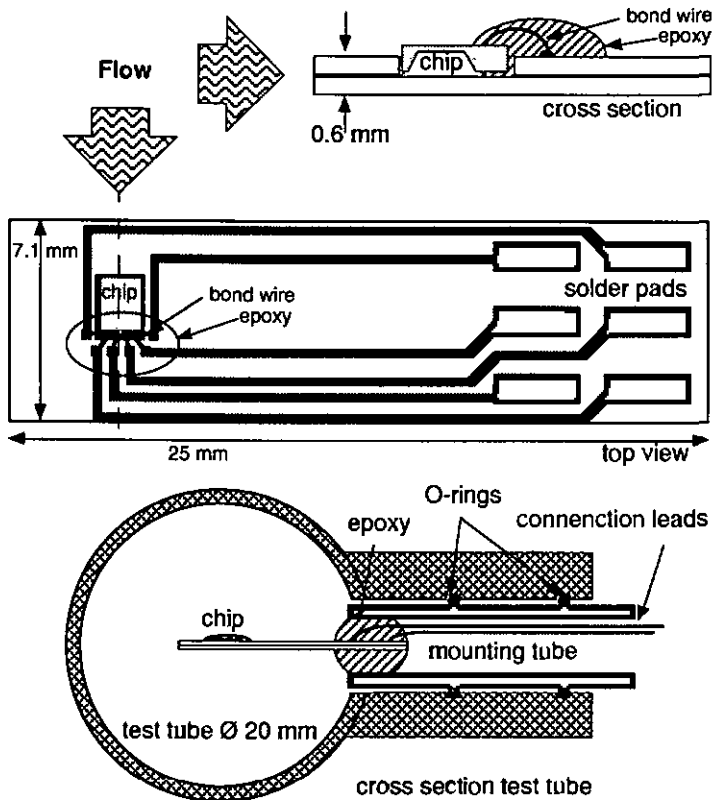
Cross section and top view of the ceramic and cross sectional view of the velocity probe mounted in the test tube.
